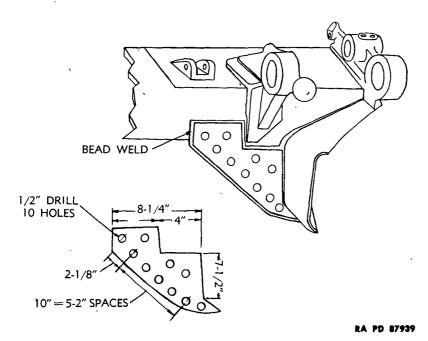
Plate To Be Welded to Inside of Right Trail
